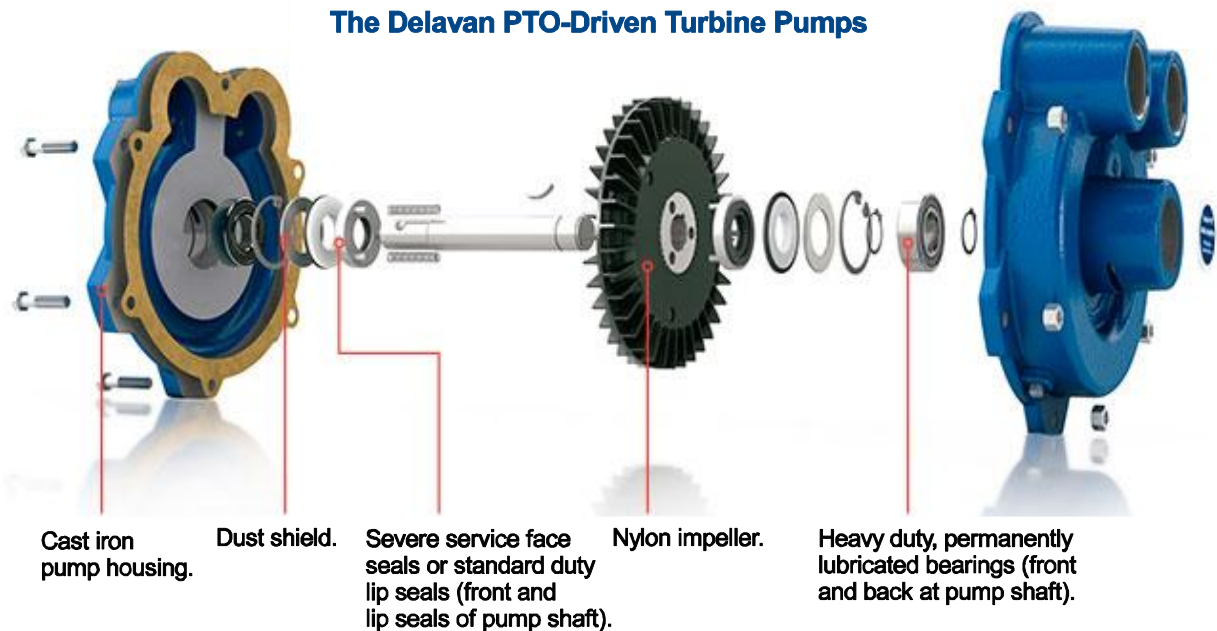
Assembly of side channel machine (<http://www.delavanagpumps.com>)
